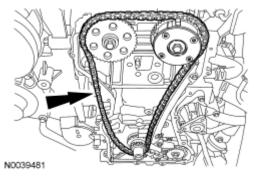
Locating Timing Chain Courtesy of FORD MOTOR CO.
